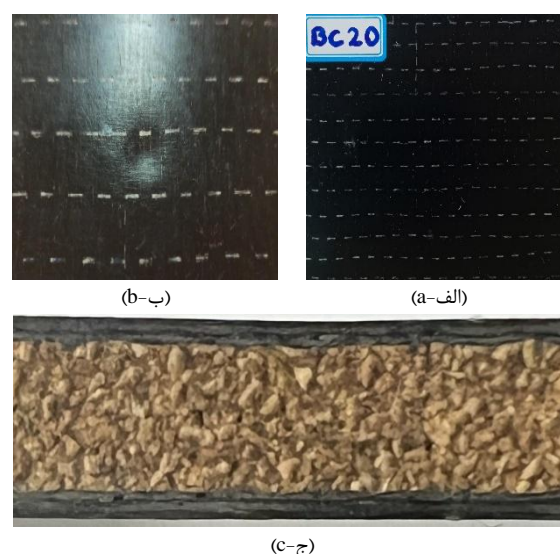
The damaged sample under impact energy of 17.1J: a) top view, b) macro view, c) section view
